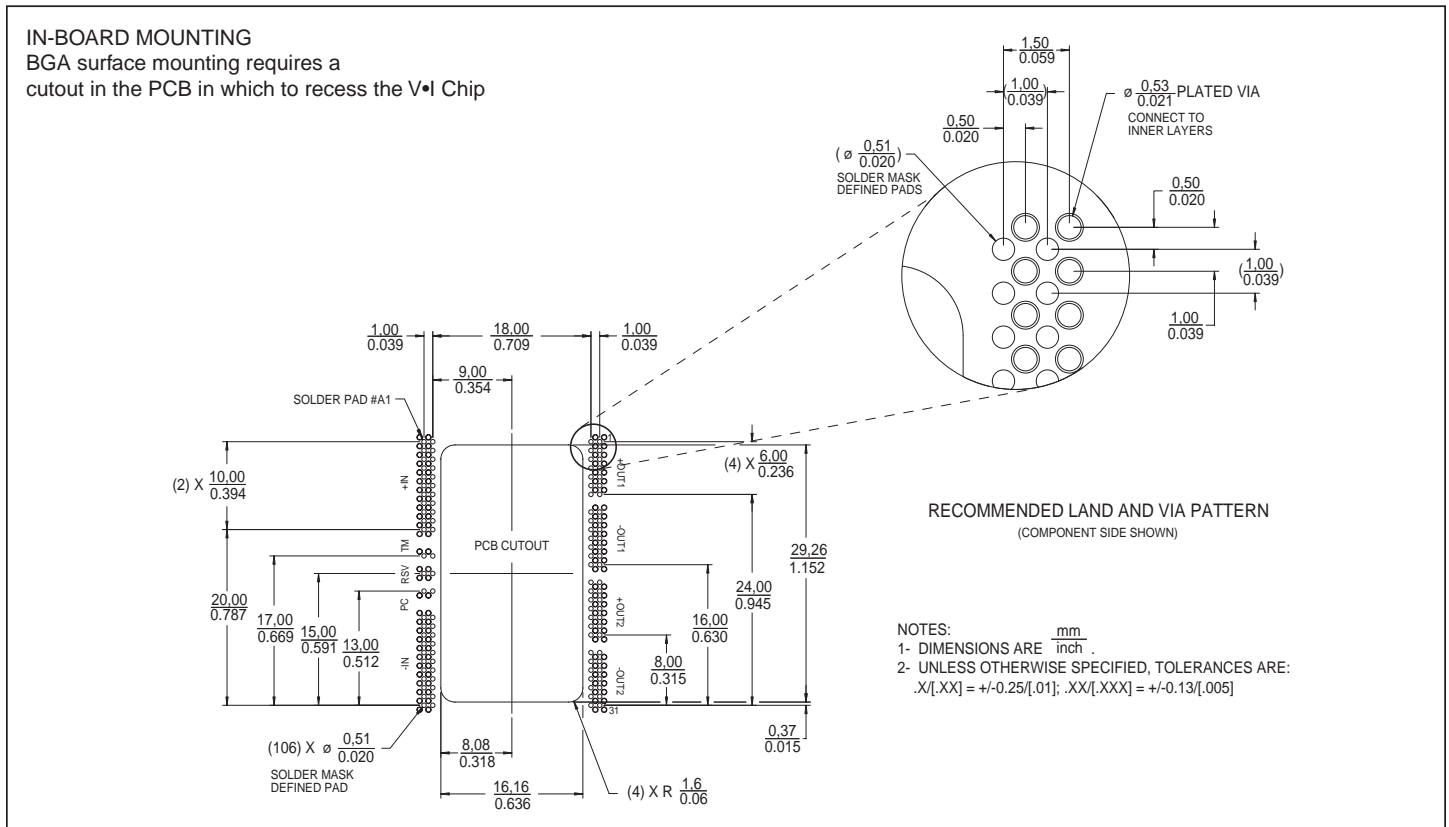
BCM BGA PCB land/VIA layout information; In-board mounting
